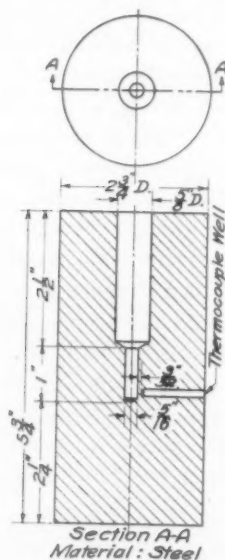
SKETCH OF STEEL MOLD USED FOR LOWERING IRON TEMPERATURE.
